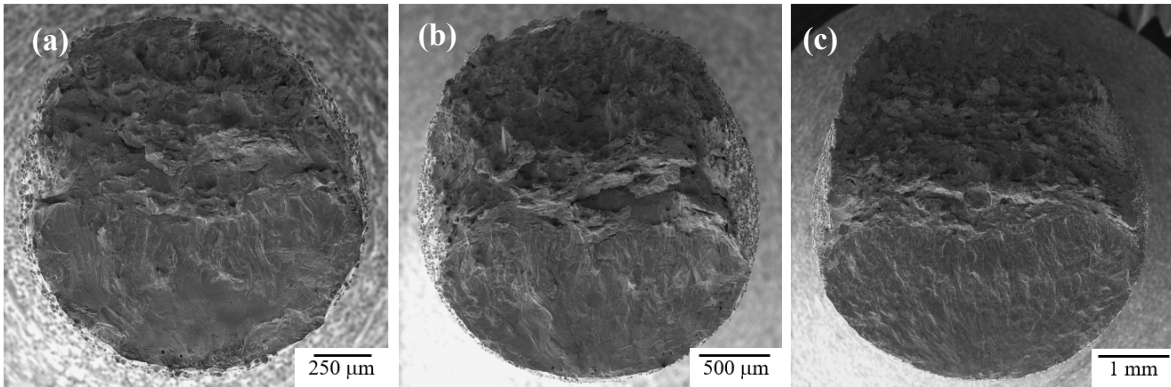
Representative ultrasonic fatigue fracture surface fractography for as-built (a) 1.5 mm CL M2, (b) 2.5 mm CL M2, and (c) 5.0 mm CL M2.
